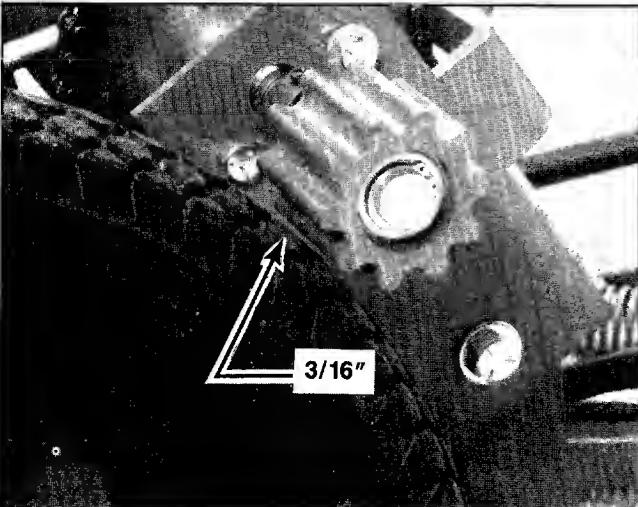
Clearance should be $3/16"$ for 22" mowers.
